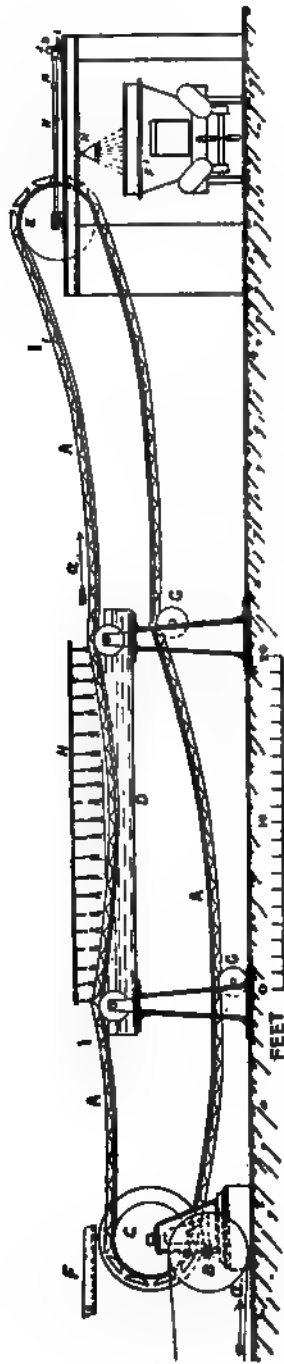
Longitudinal Elevation of Hawdon's Slag Casting Machine.
